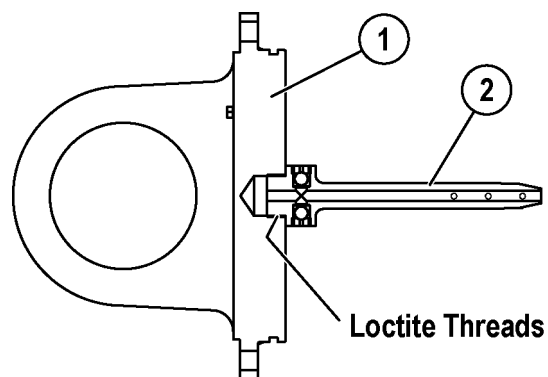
QUILL ASSEMBLY TIGHTENING
